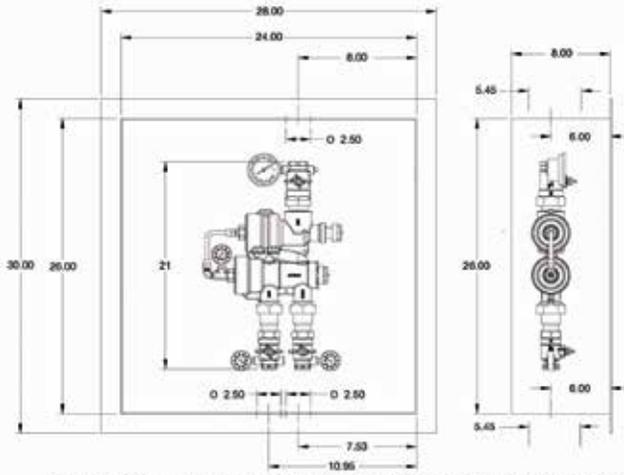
Typical Valve Dimensions with Stainless Steel Recessed Cabinet Option
